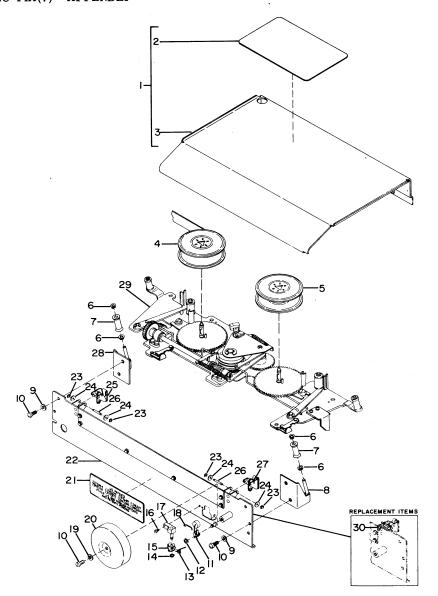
Rear Frame Assembly SL-4-03315B Figure 21
